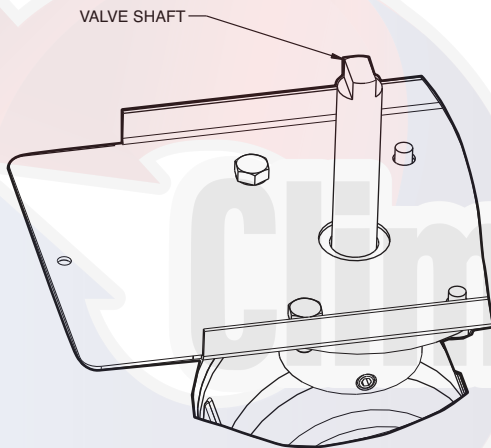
Fully Open Ball Valve with Actuator Removed
